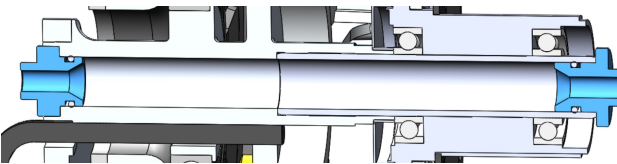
Both left and right side quick-release inserts fit inside axle bore, but they have different widths and diameters.
